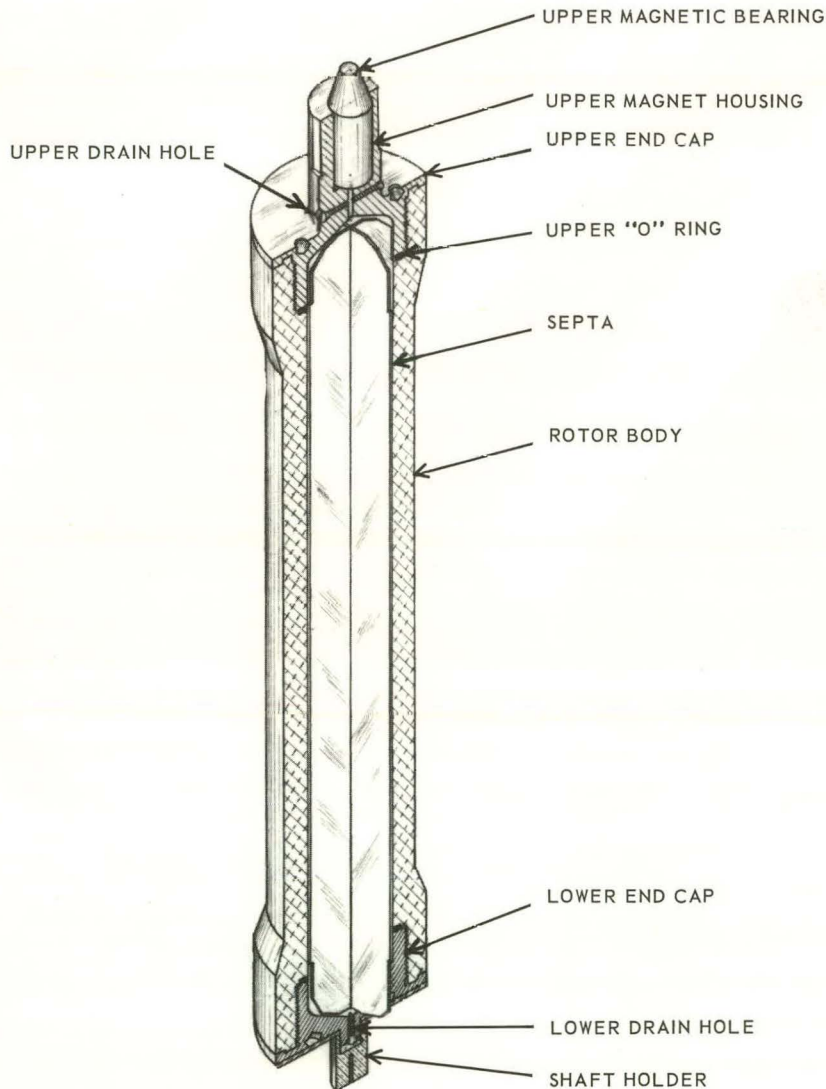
Assembly Drawing of Rotor C-II.
